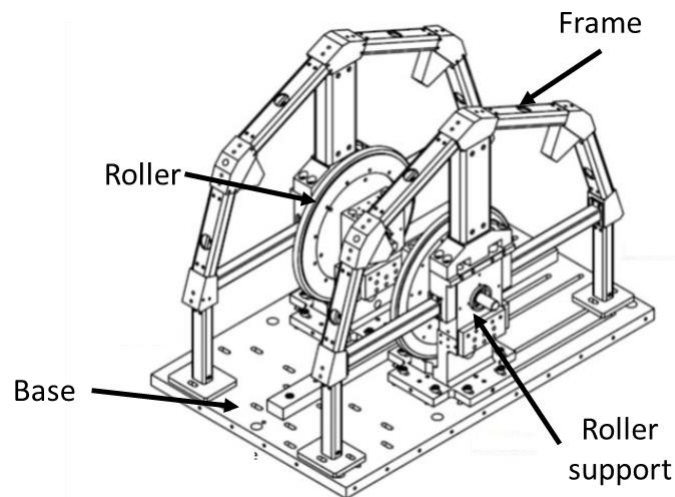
Multi-axle roller-rig with frame (CAD drawing), modified from [114].
